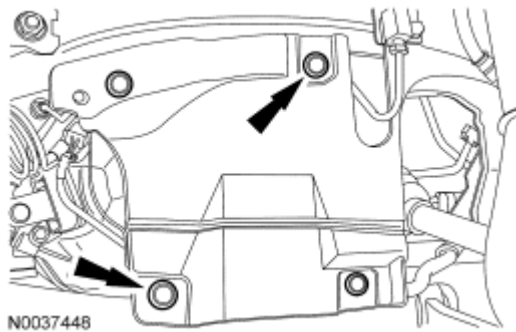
Locating LH Splash Shield And Pin-Type Retainers
